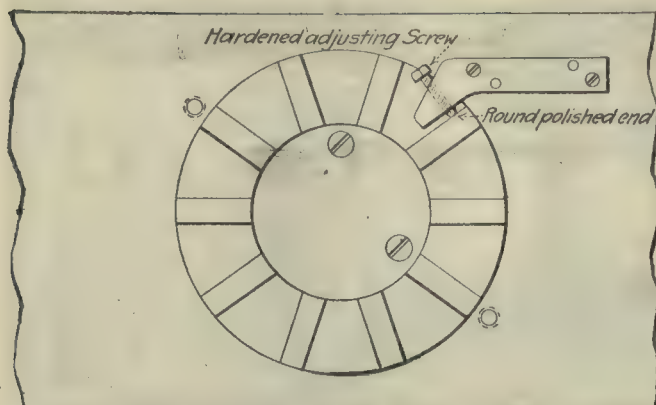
SET-UP FOR MACHINING MONEL METAL POINTS
